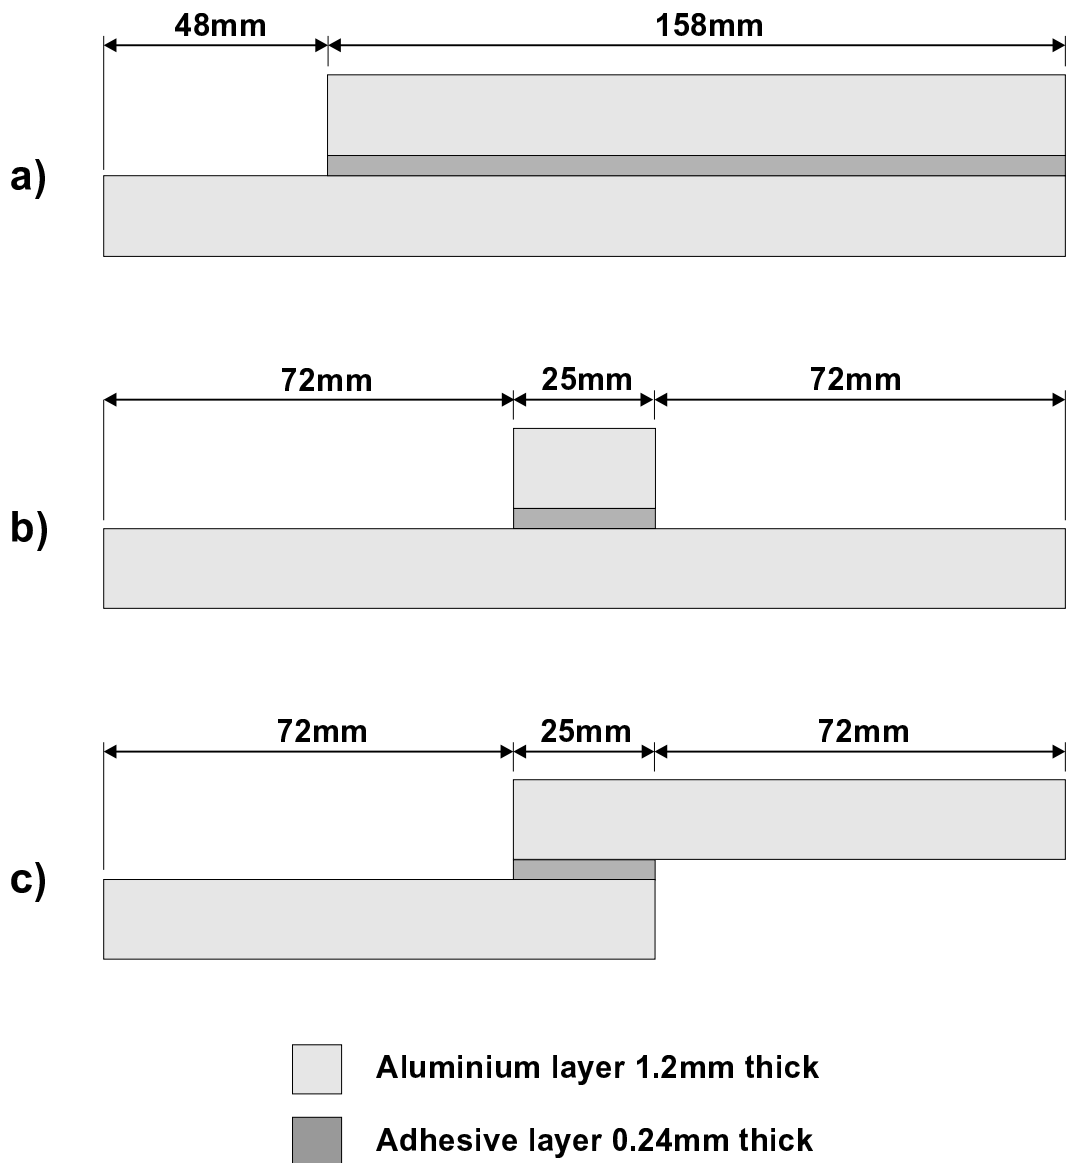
5 Diagram of finite-element models used a) leading edge common to both stringer and lap joints. b) Stringer joint c) Lap joint.
